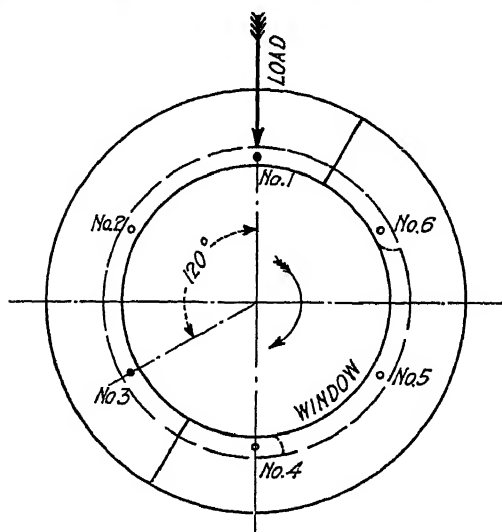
LOCATIONS OF THERMOCOUPLES IN BEARING SHELL
